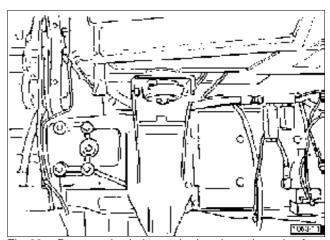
Remove the bolts anchoring the cab to the front silent-blocks (left and right hand side).
